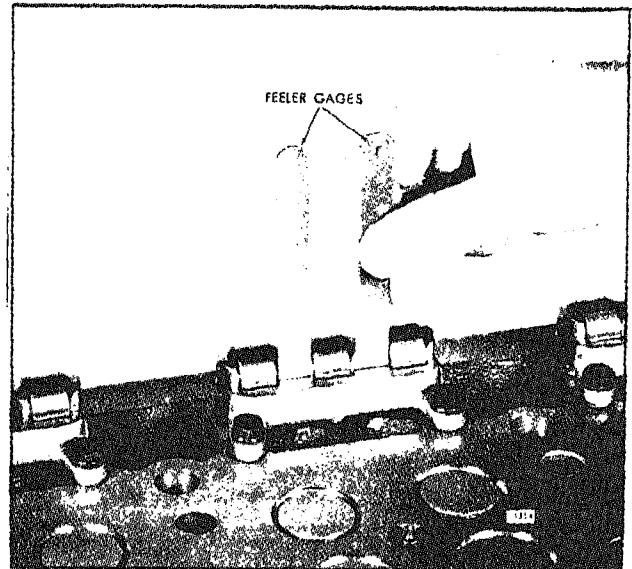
Checking the Clearance Between the Cam Follower Guide and Cam Follower Legs
